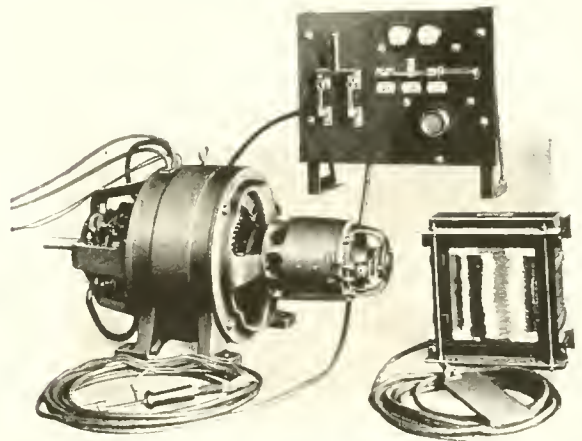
Lincoln Arc Welder belt driven. This type of welder is used where a plant is not supplied with electric power.
